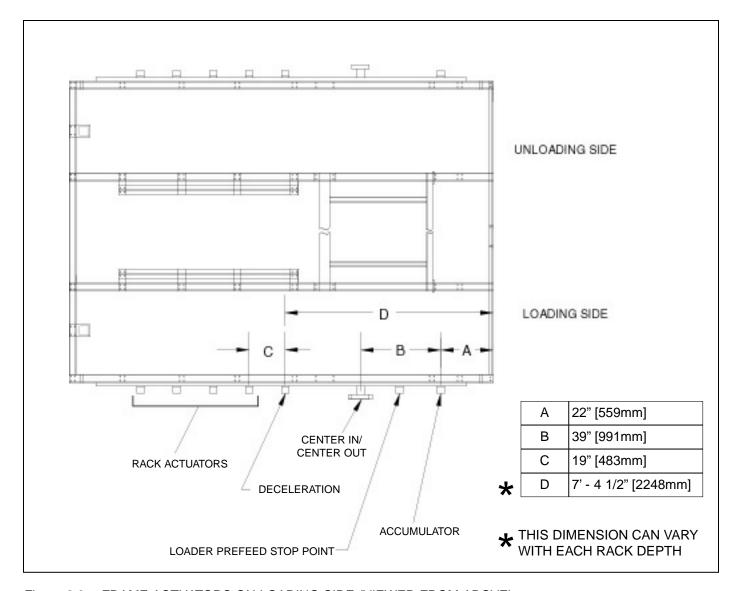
FRAME ACTUATORS ON LOADING SIDE (VIEWED FROM ABOVE).
